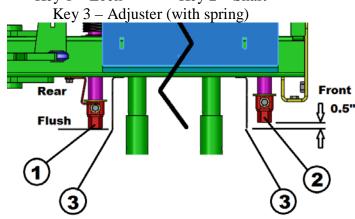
Spring Tension Adjustment Key 1 – Rear (V-Groove) Side Idler Adjust Key 2 – Front Side Idler Adjust Key 3 – Indicator
